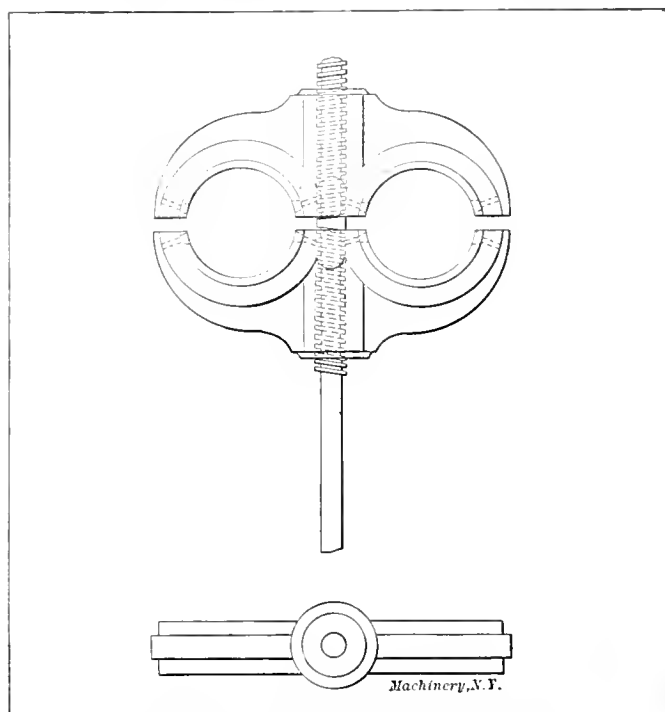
Friction Collar of Screw Feed Wheel, Whitworth Drilling Machine
